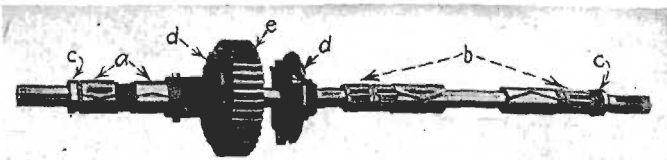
Mower axle and parts: A, B, roller bearings; C, leather oil seal; D, pawl and pawl holder; E, drive gear containing ratchets.
